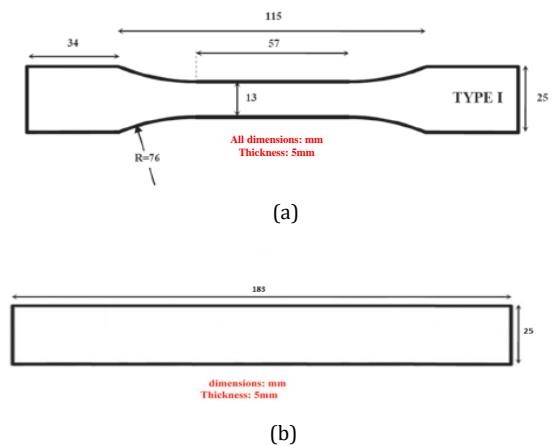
Dimensions of the (a) tensile and (b) bending samples
